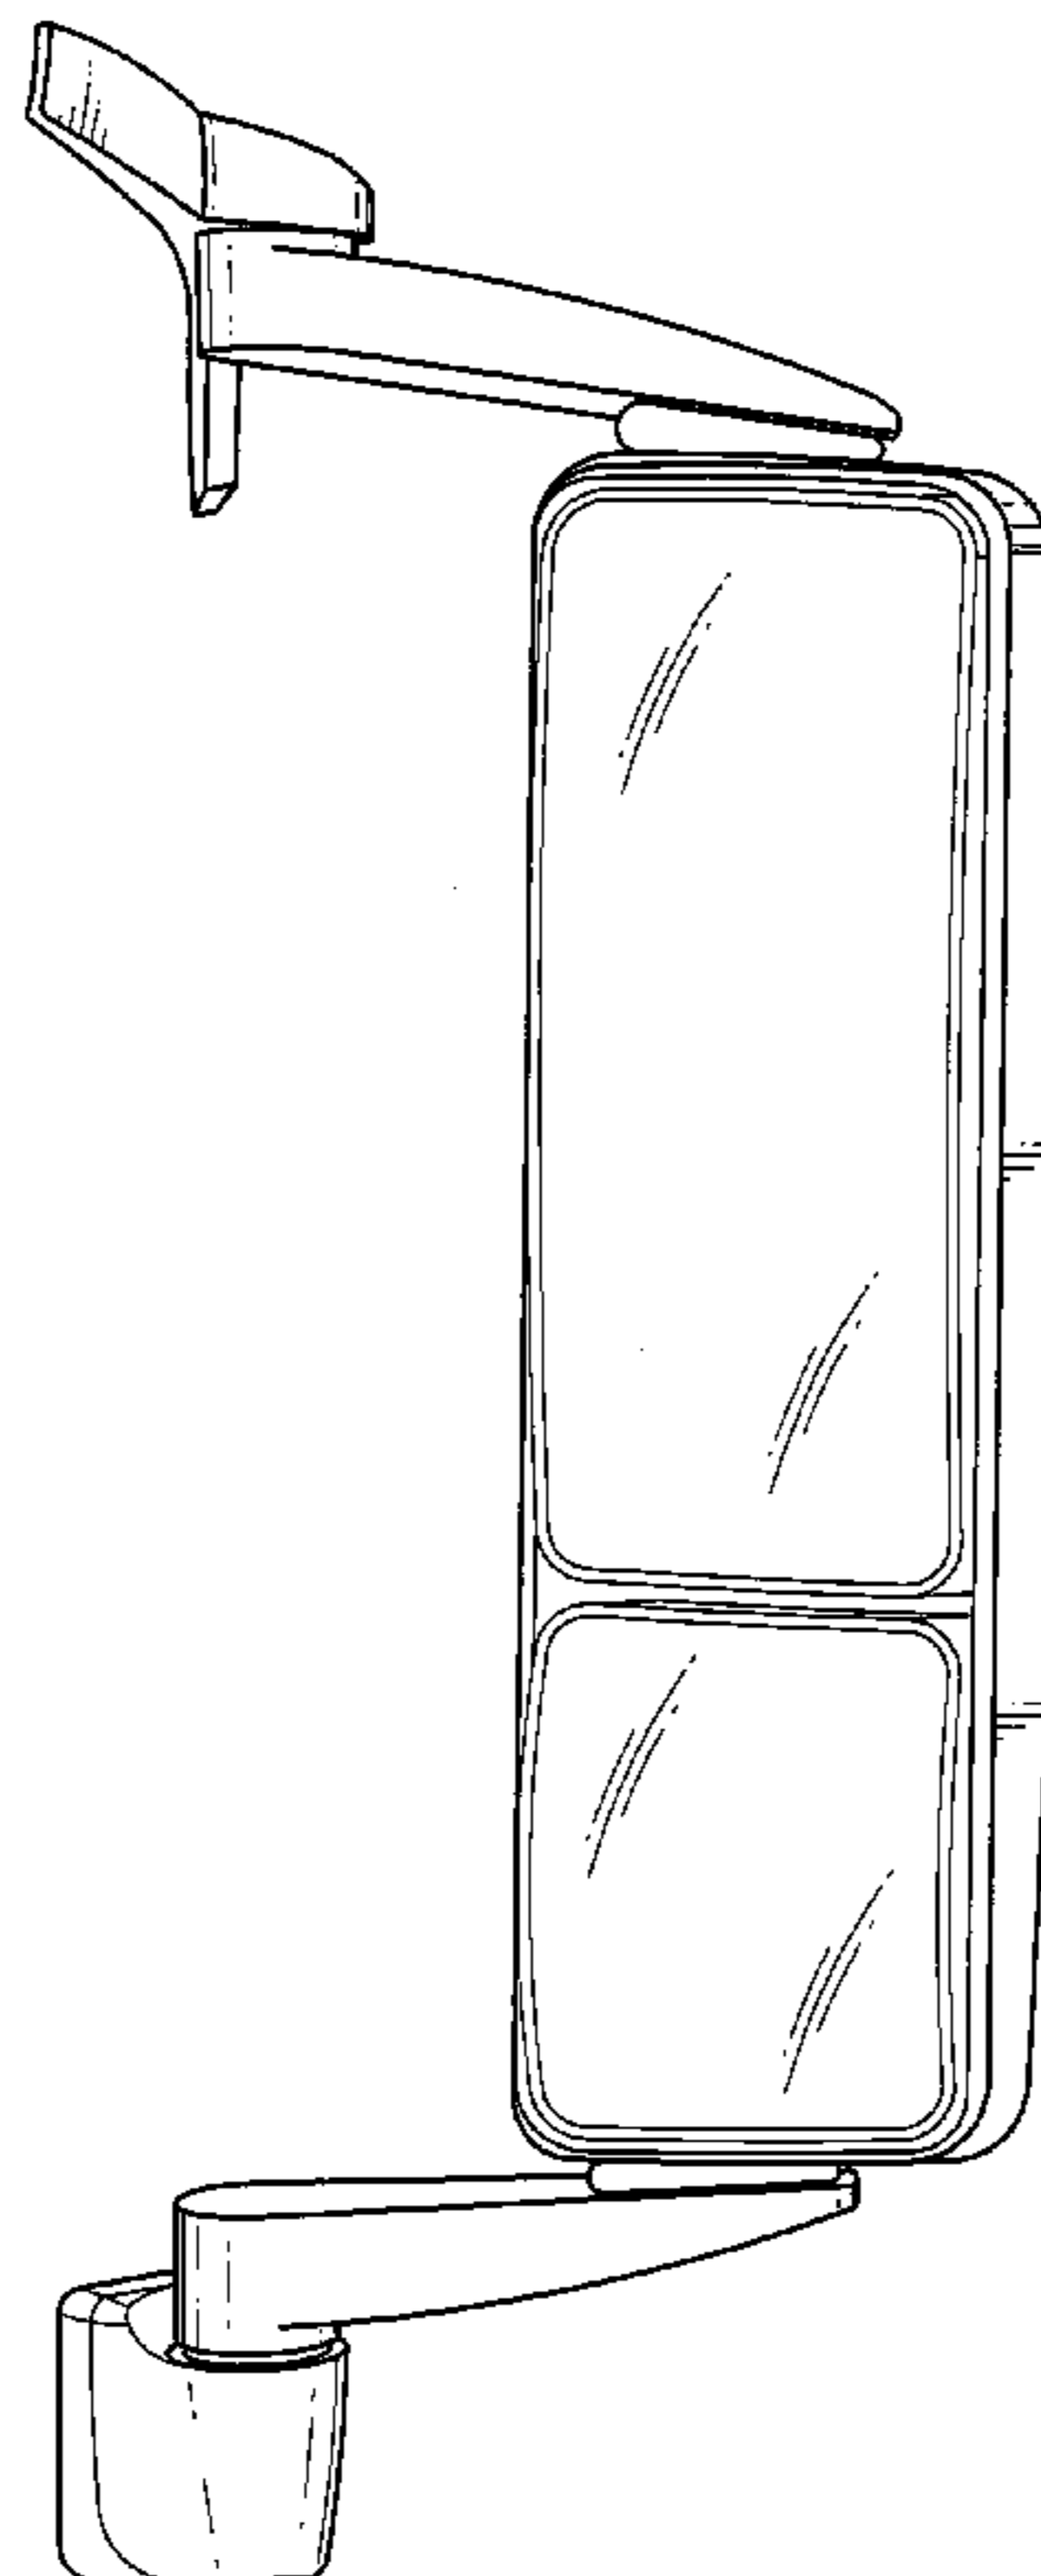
is a back view of the motor car side mirror in accordance with the present invention;
